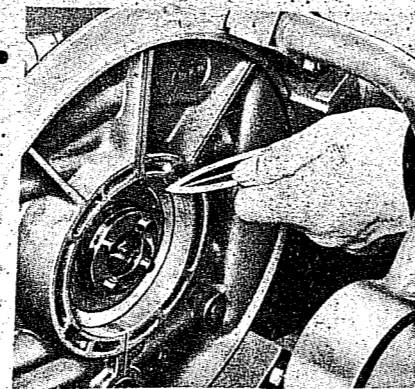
Removing the sharp edges on the oil seal counter-bore.
